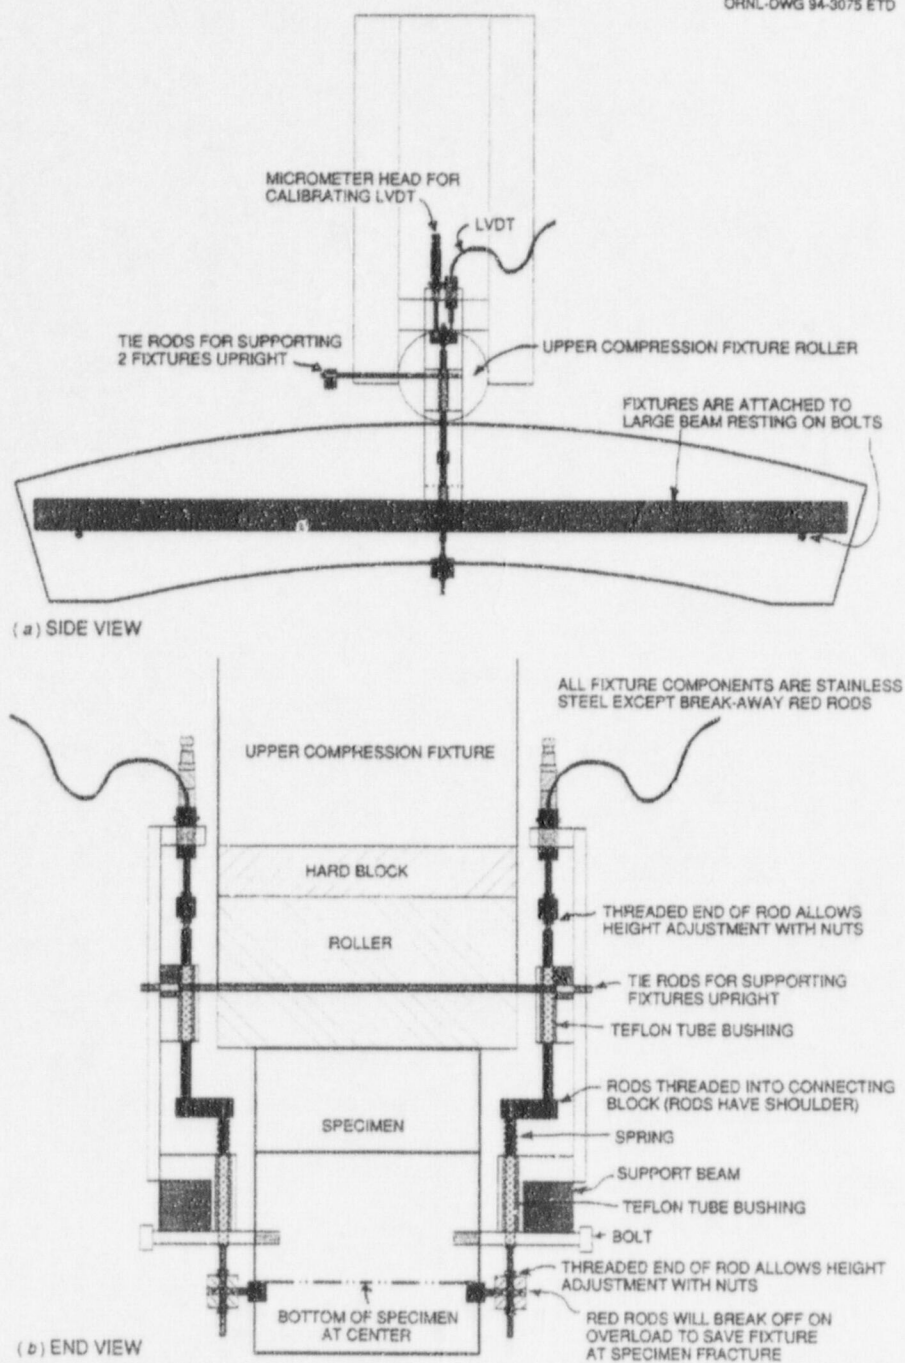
Fixture used to measure load-line displacement (LLD) on clad beam tests: (a) side view and (b) end view.
